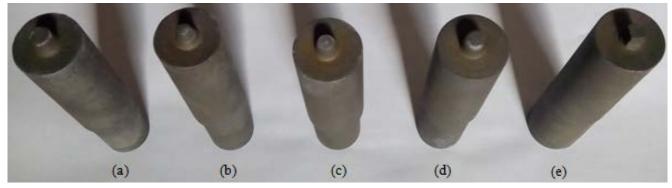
Manufactured tools (a) cylindrical threaded (b) tapered threaded (c) simple tapered (d) simple cylindrical (e) simple square
